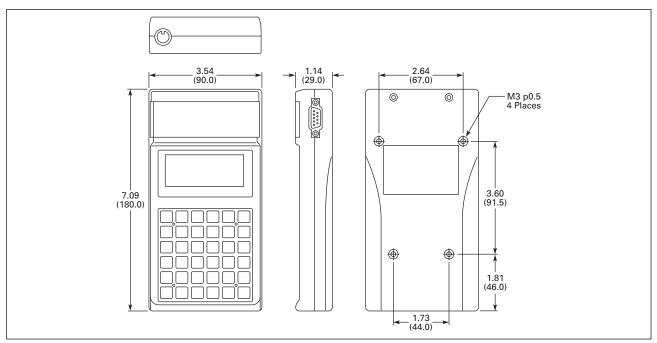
ELC-HHP — Approximate Dimensions in Inches (mm)
